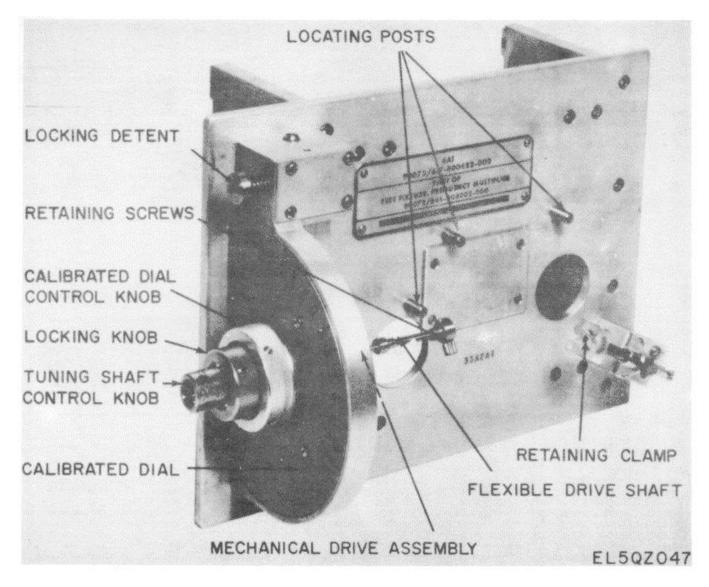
Frequency Multiplier Test Fixture TS-3824/GRM-95(V)2.
